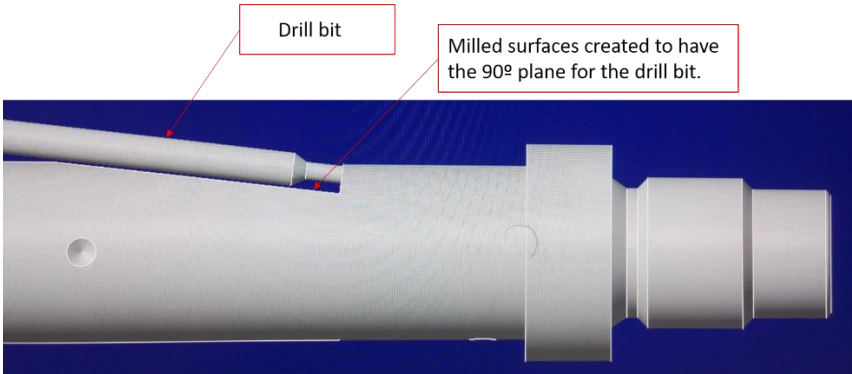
3D model showing the drill bit correctly placed thanks to the new milled surfaces
